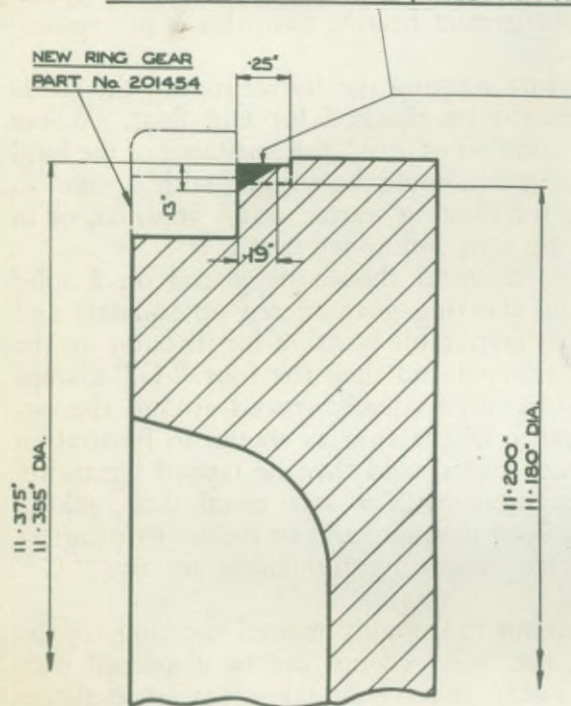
Showing modifications required to flywheel to accommodate 8/10 pitch starter gear
